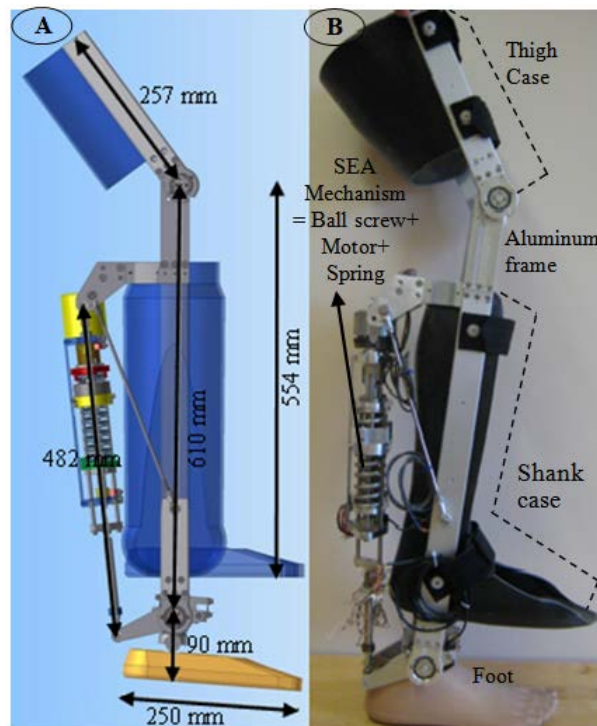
A) The CAD view with dimensions B) The constructed robotic prosthesis PAKO I.
